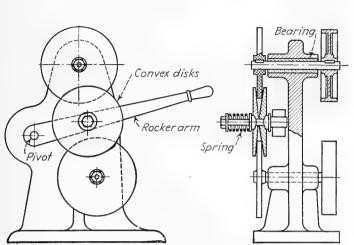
Device for transmitting power between fixed parallel shafts. Convex disks mounted freely on a rocker arm and pressing firmly against the flanges of the shaft wheels by a coiled spring form the intermediate sheave. Speed ratio changed by moving rocker lever. No reverse possible, but driven shaft may rotate above or below driver speed. Convex disk must be mounted on self-aligning bearings to ensure good contact at all positions.
